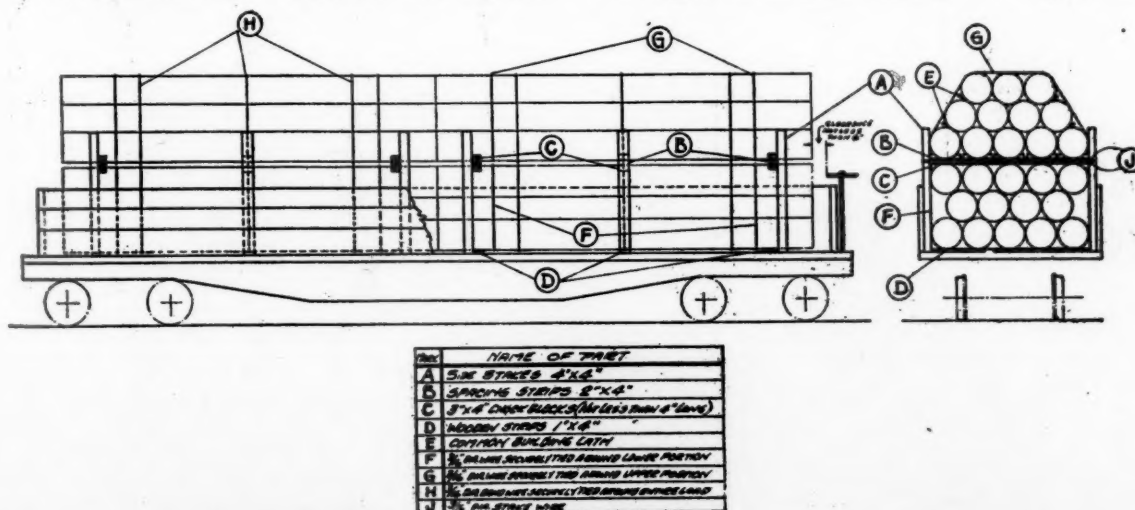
B—Alternate method of loading wrought-iron pipe 14 in. to 26 in., inclusive, in diameter in pyramidal form
